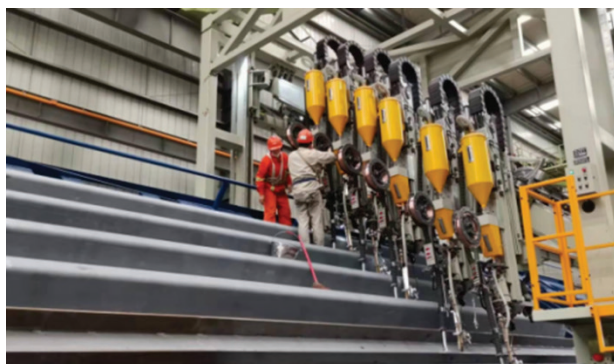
The U-rib welding robots (September 2019) Credit: ZPMC
